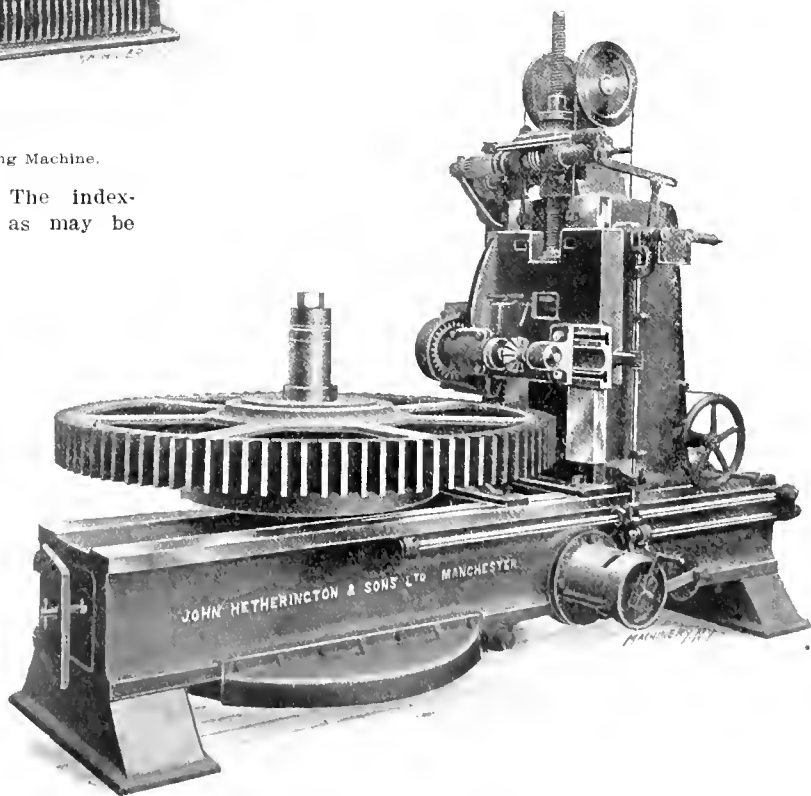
The Hetherington Automatic Gear-cutting Machine.
